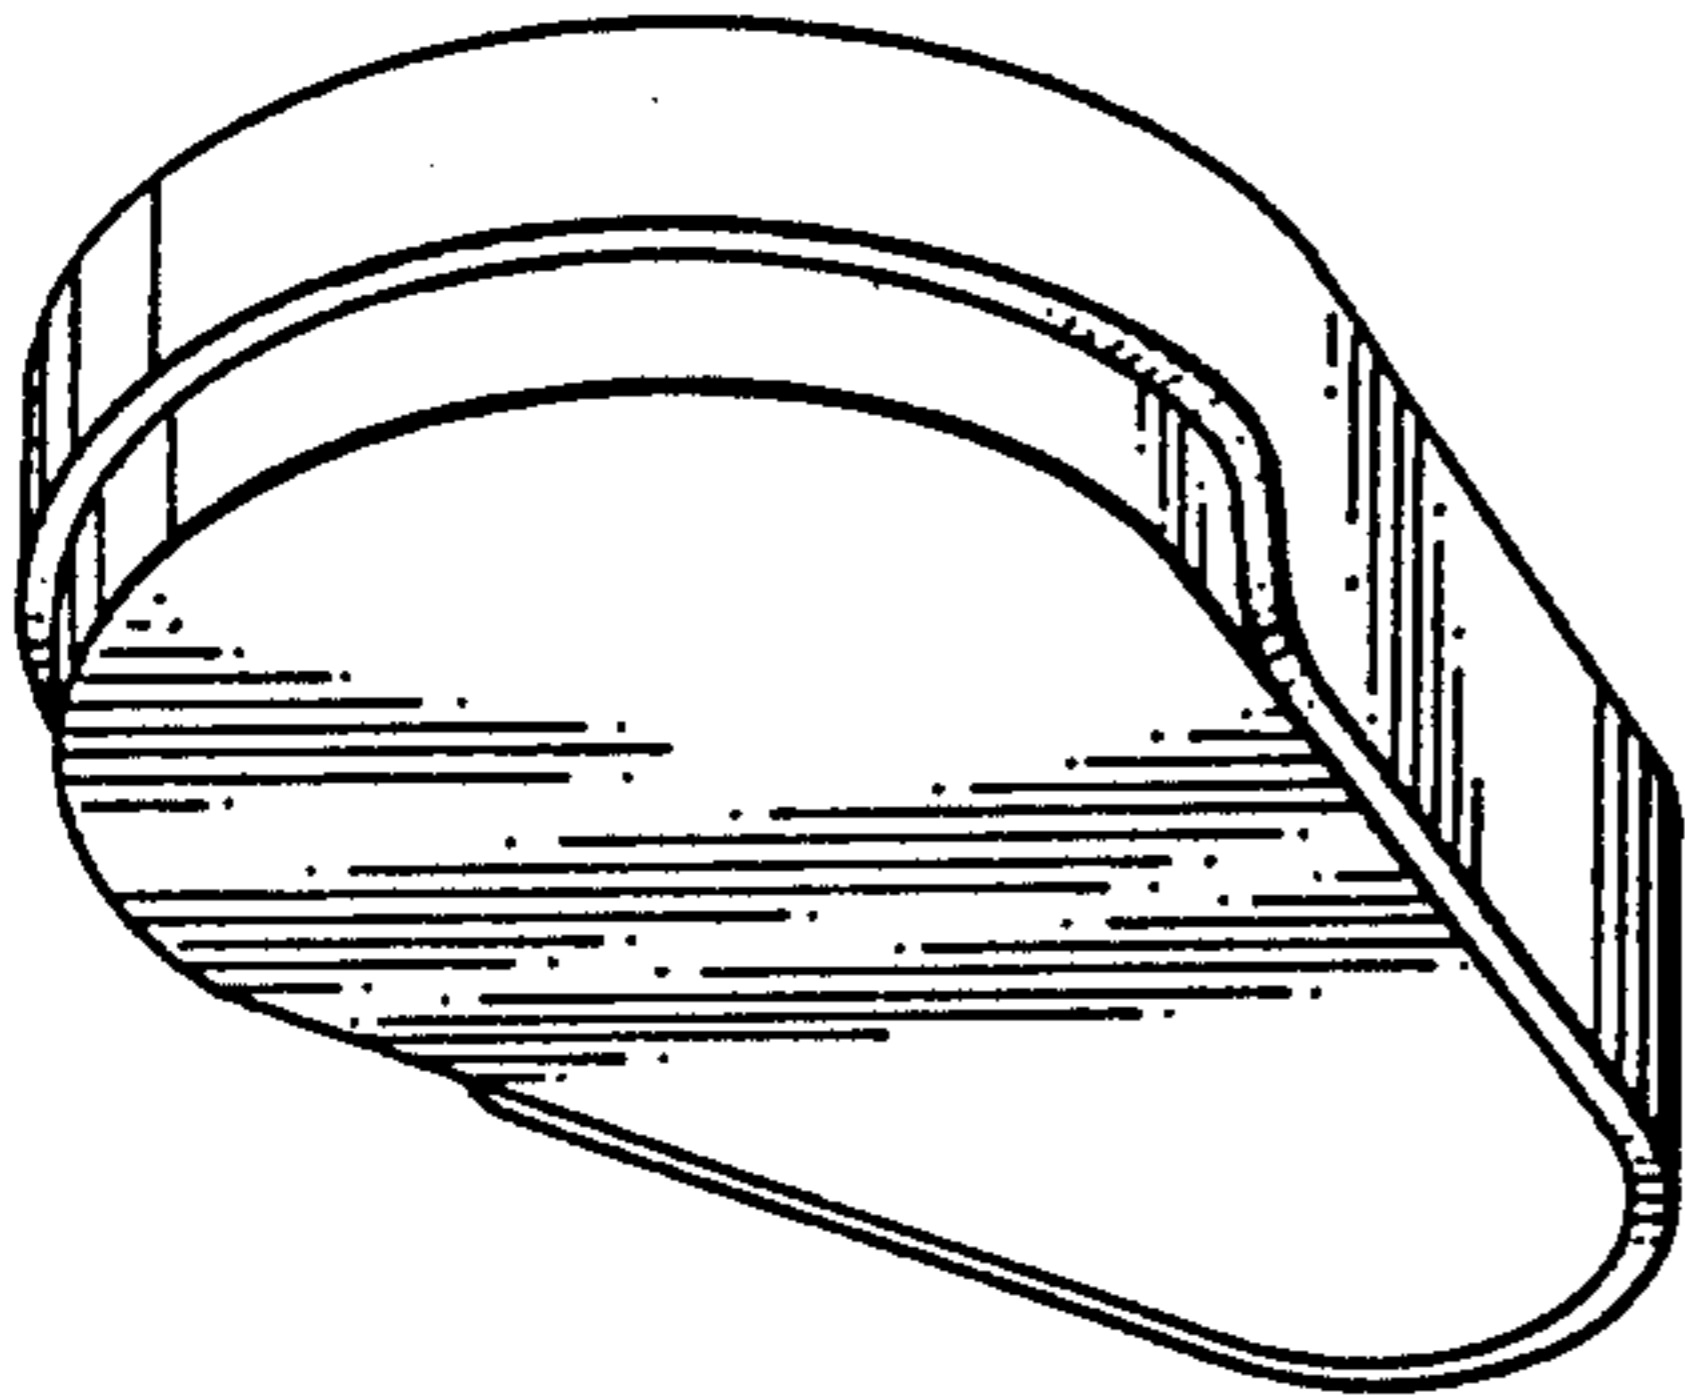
is a top, right front perspective view of a dispenser for tape used to identify surgical instruments showing our new design;
